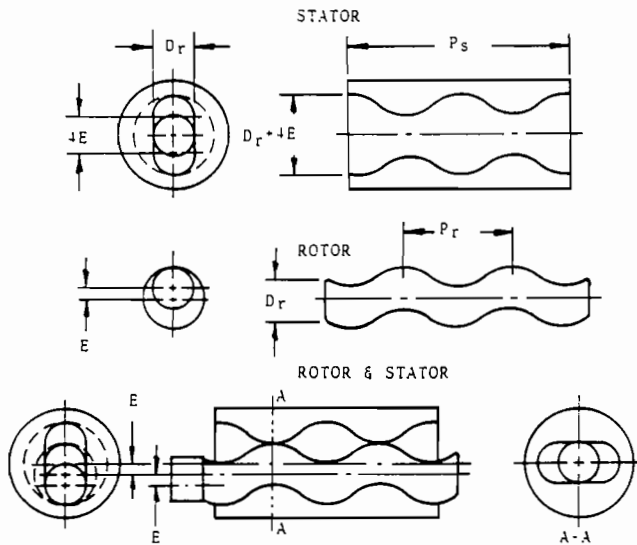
A Progressing Cavity Pump has a Helical Rotor with a Single Lead (or Thread) Rolling Eccentrically in a Helical Stator with Two Threads, the Pitch Length of the Stator Being Twice that of the Rotor.
